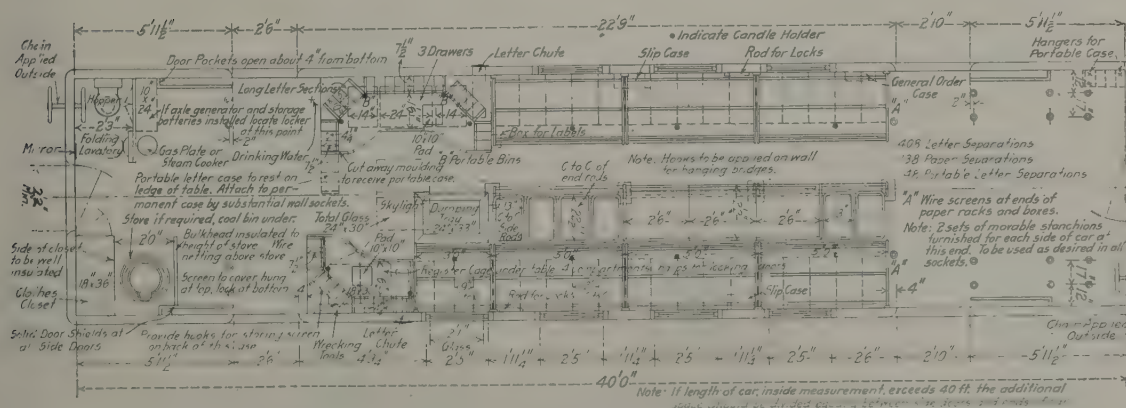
Floor Plan Showing U. S. Government Requirements for 25-ft. Mail Apartment.
